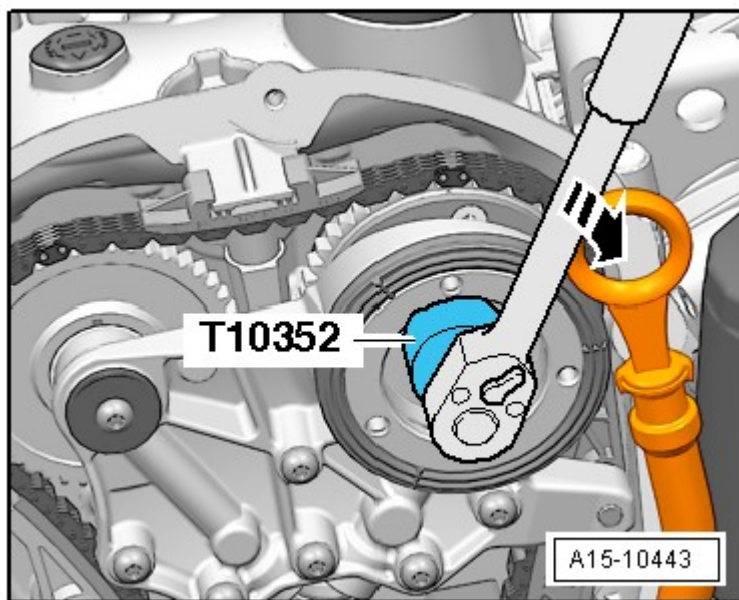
Identifying Assembly Tool T10352 To Remove Control Valve
